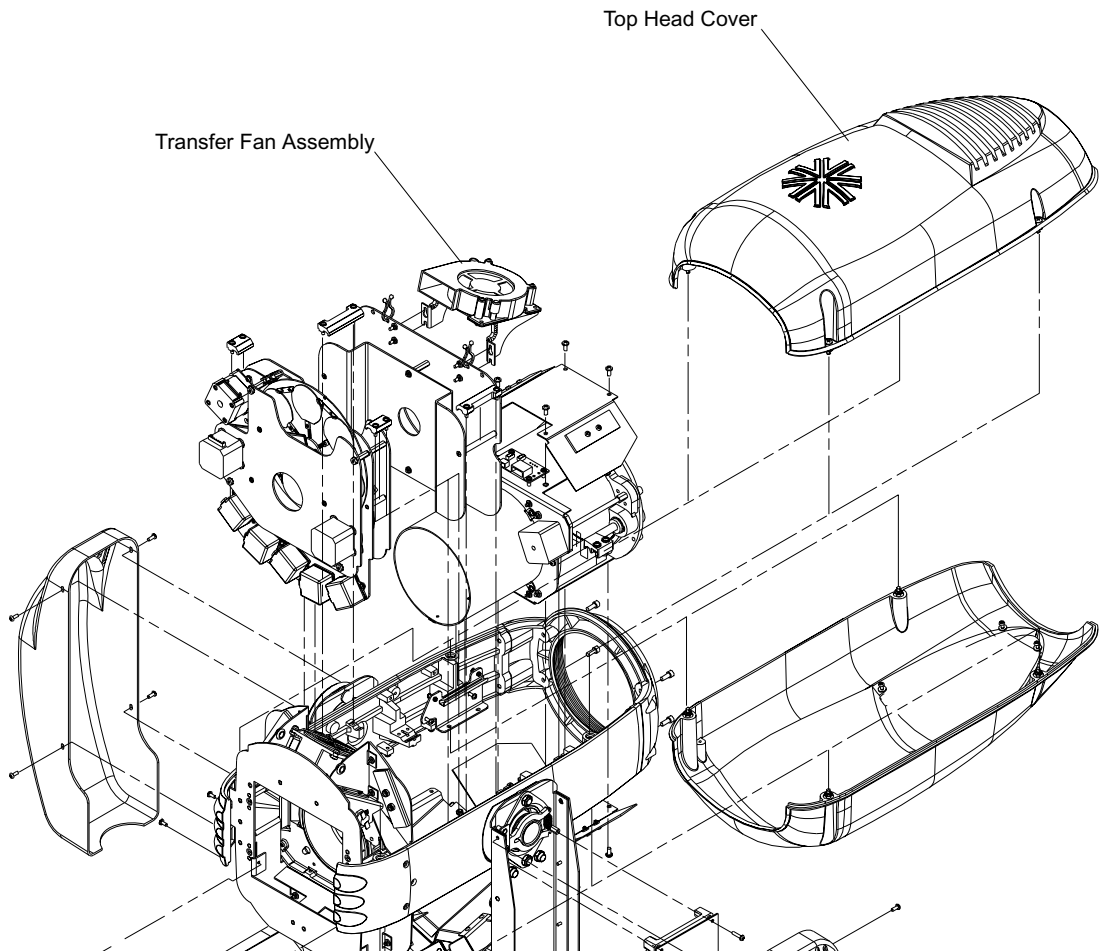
VL3000 Transfer Fan Assembly Replacement
